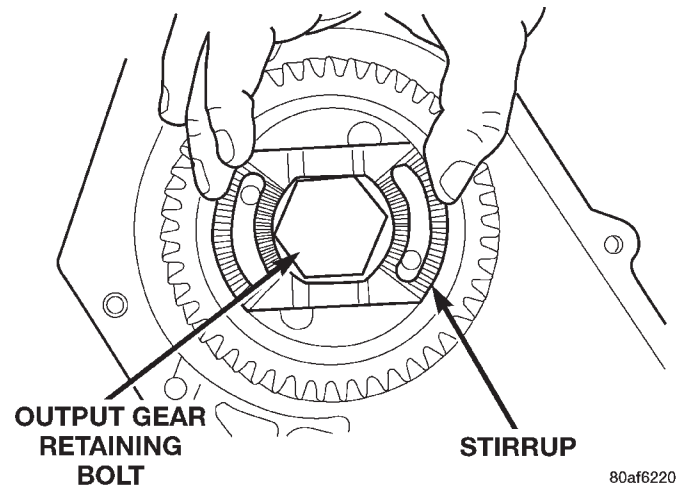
Output Gear Retaining Bolt Stirrup (Serration Side Out)
